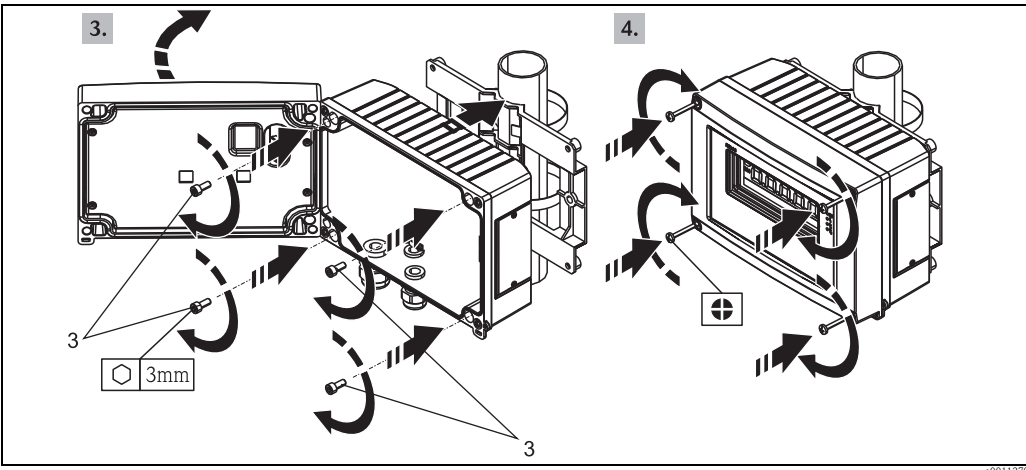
Mounting the field indicator on a pipe with mounting bracket, steps 3.-4.
